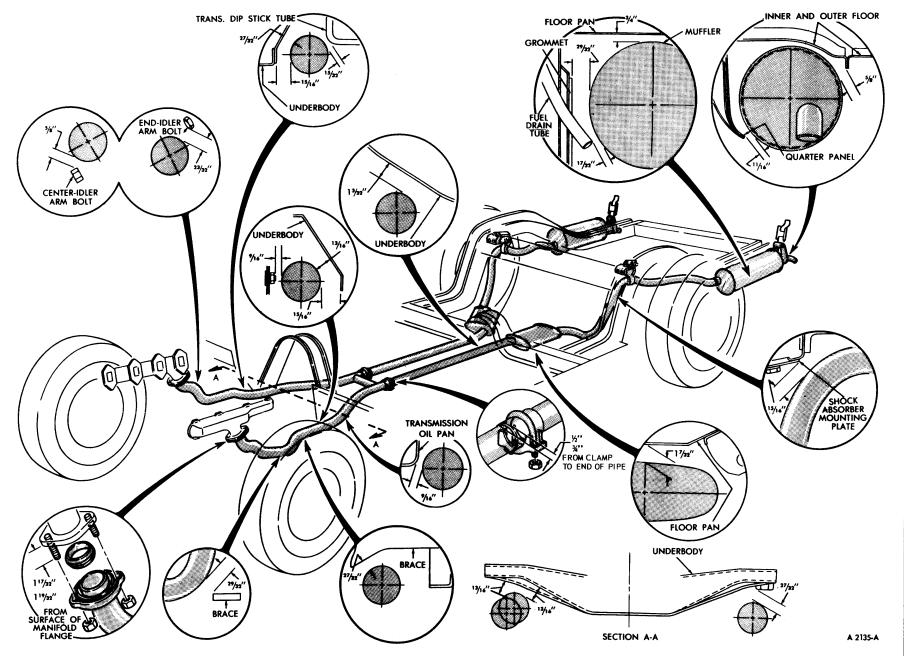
Thunderbird Exhaust System Clearance Dimensions
